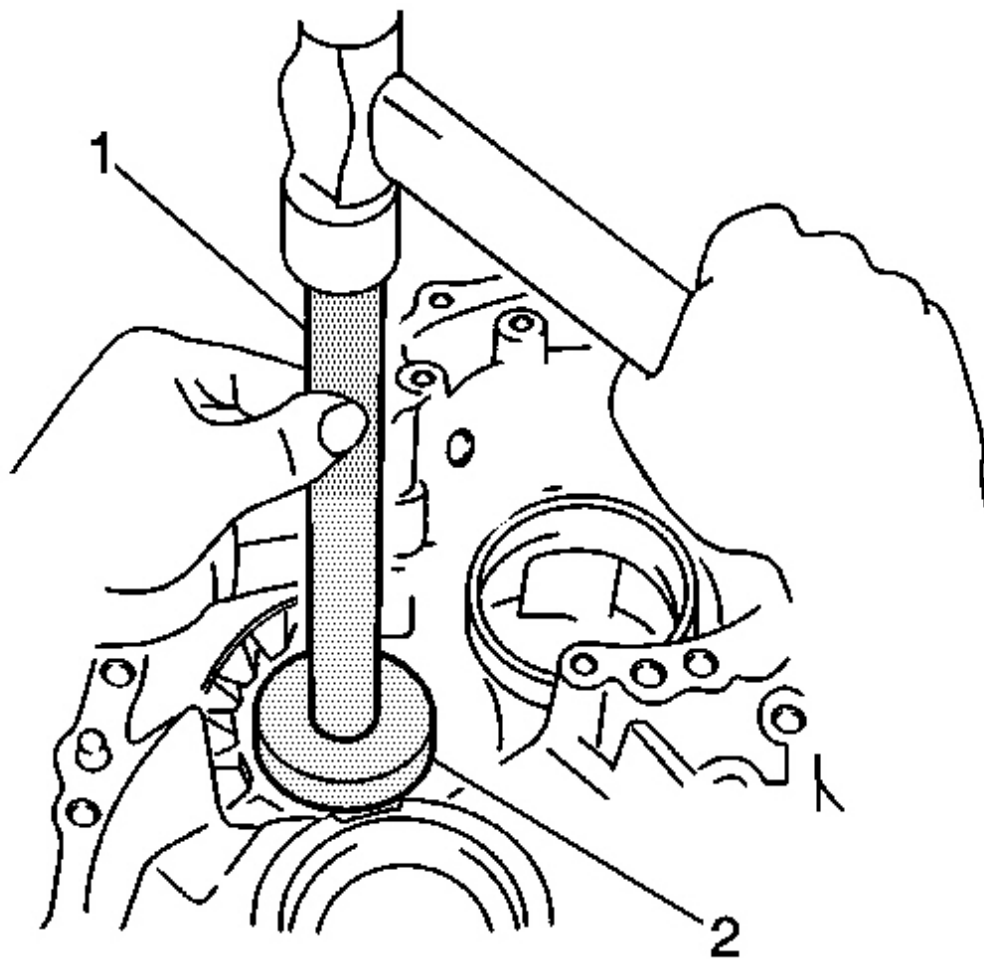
Pressing In A New Outer Tapered Roller Bearing Race Using DT 46464 & DT 46465
